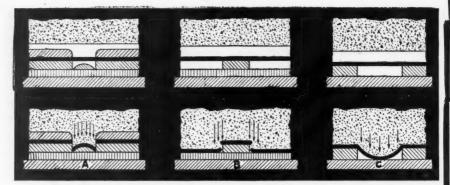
Drawing illustrating methods of making effective use of pressure area. A—Area available to pressure is at hole only.
